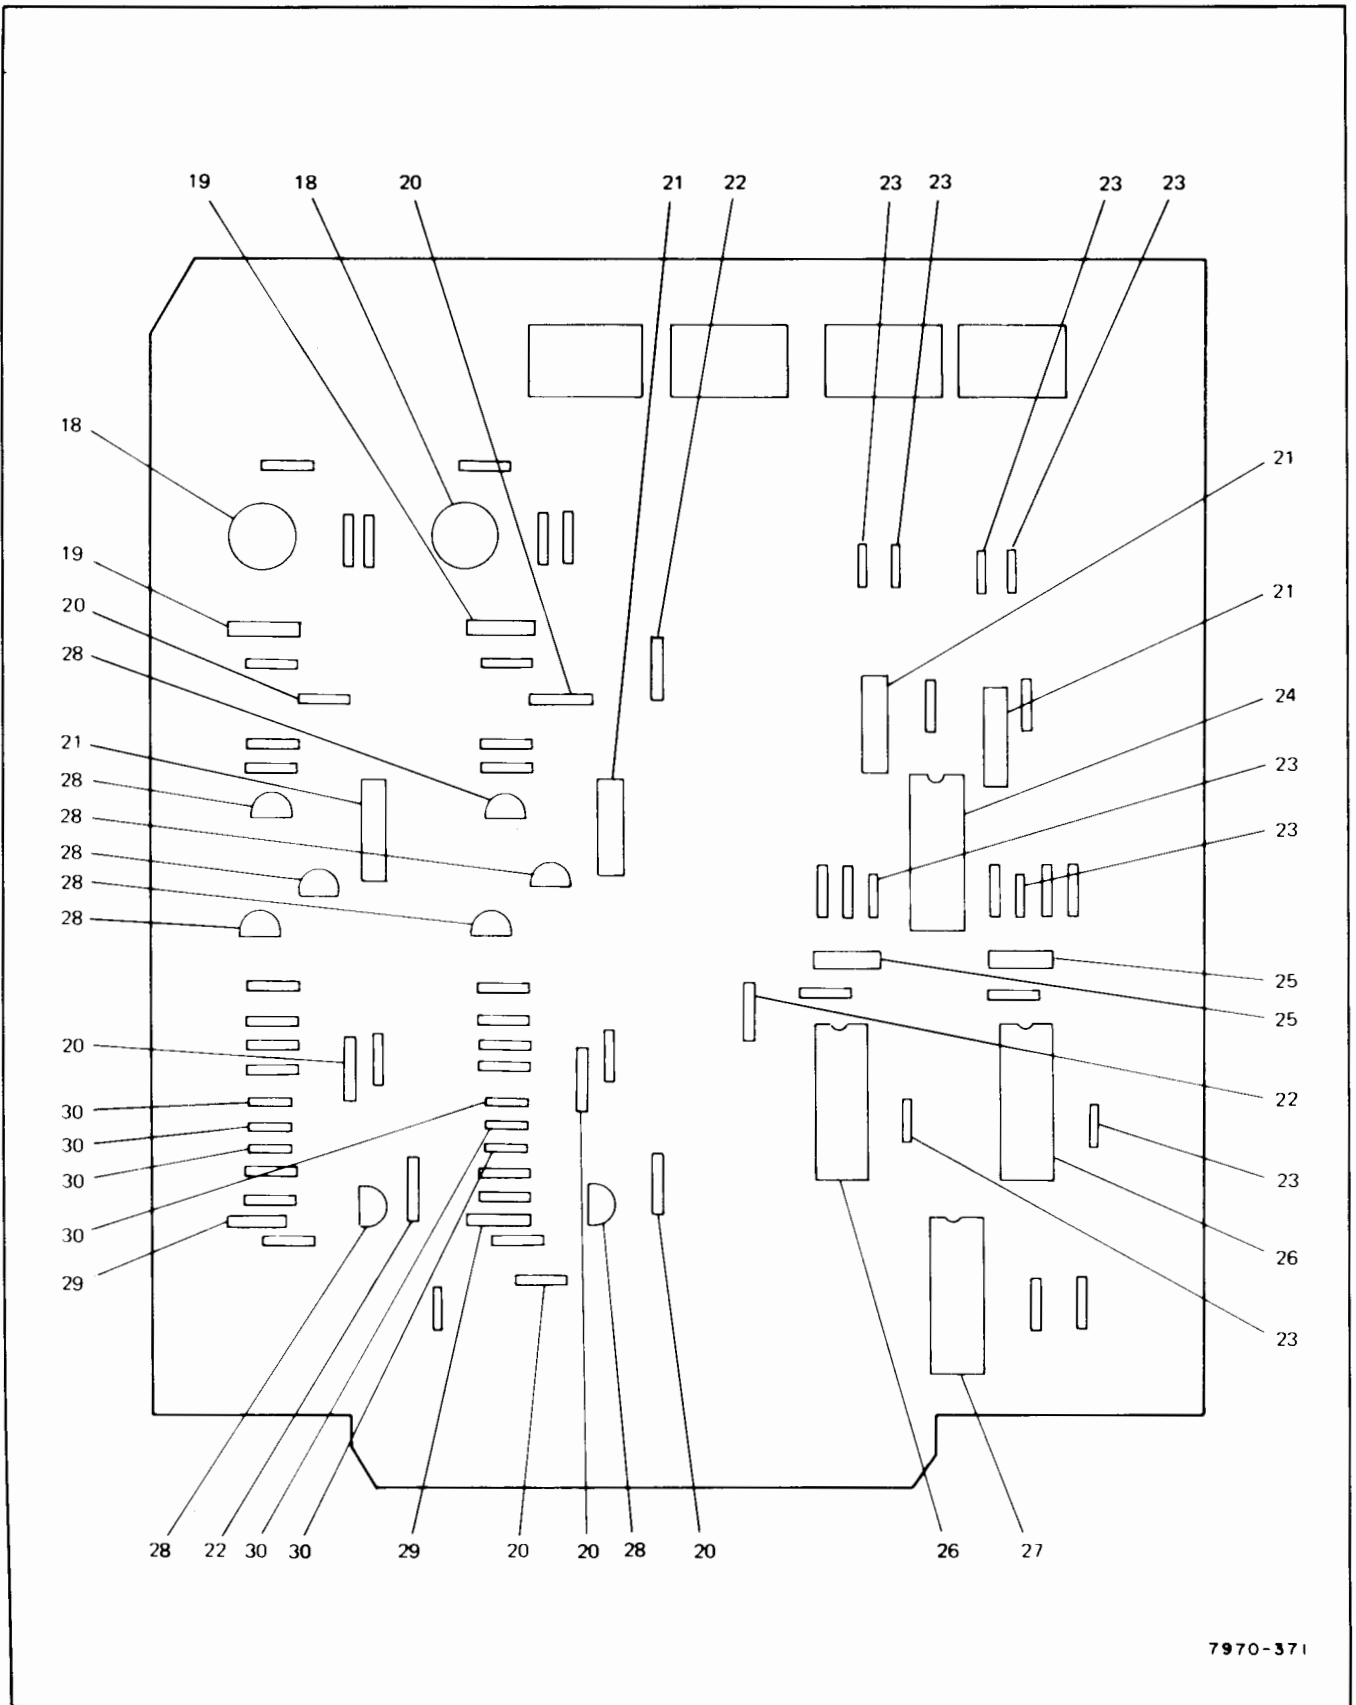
Dual-Channel Read Data Assembly (10 - 20.9 ips), Parts Location Diagram (Sheet 2 of 2)
